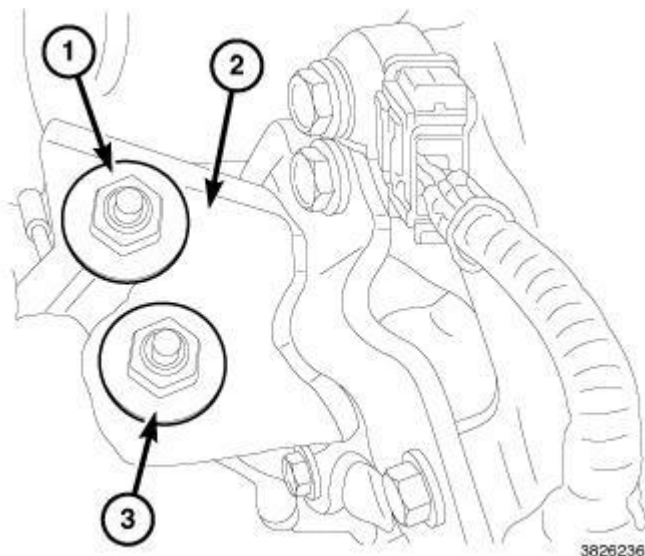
Upper Engine Bracket, Mount & Bolts - Left
